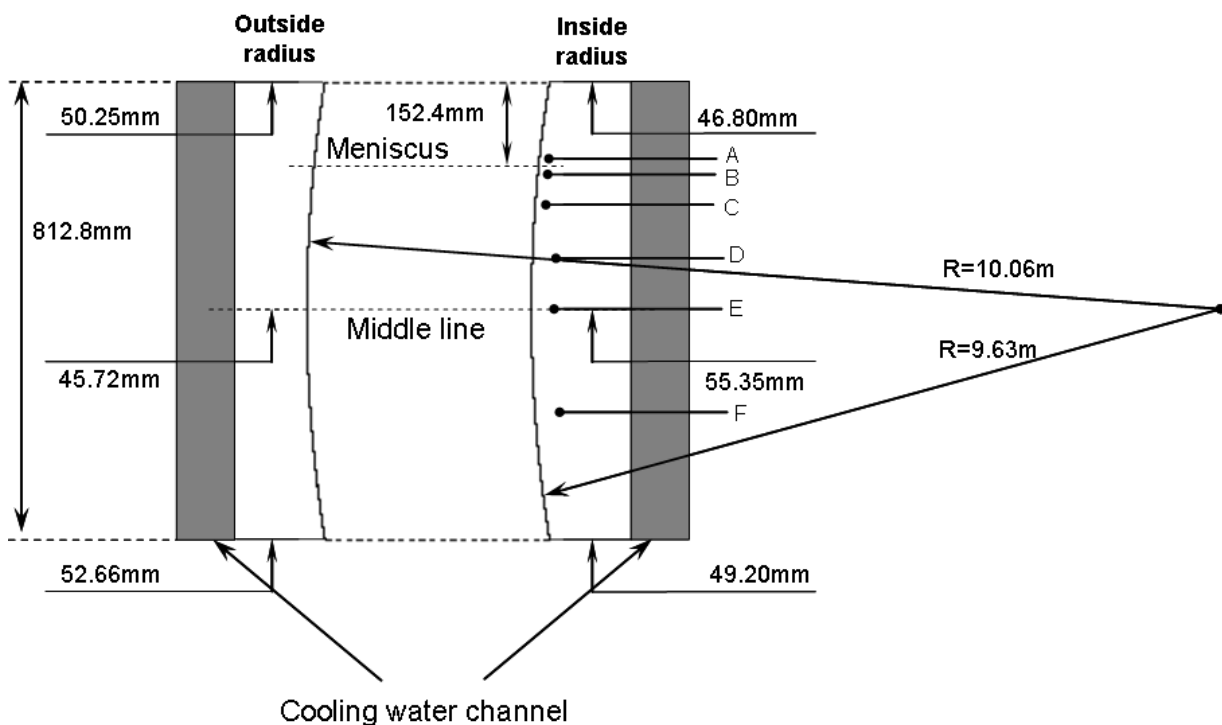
Beam-blank mold geometry, slice through WF centerline
